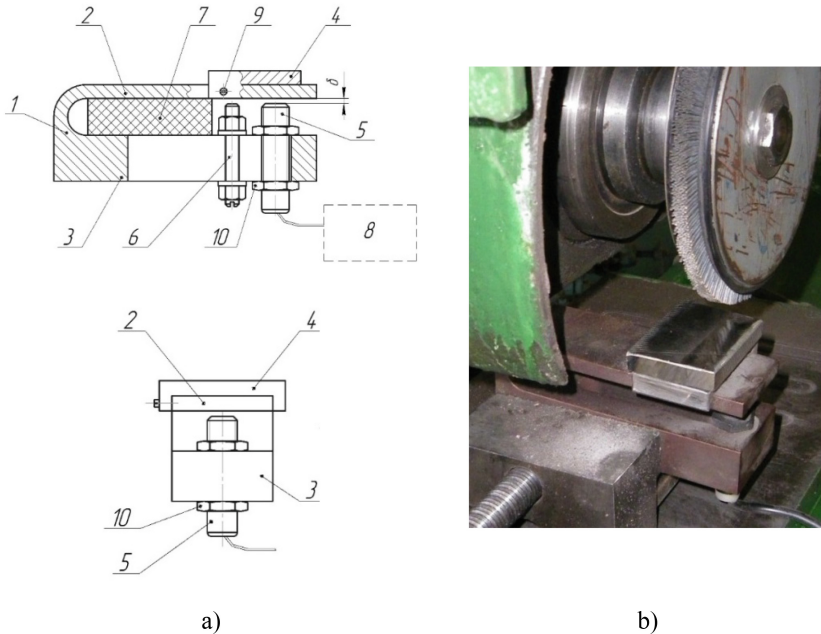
Draft (a) and appearance (b) of the dynamometer: 1 - bracket; 2, 3 - upper and lower arms of the bracket; 4 - carriage; 5 - XS4P12AB110 eddy current sensor; 6 - safety device; 7 - vibration damper (buffer pad); 8 - recording device; 9 - screw; 10 – nut.
